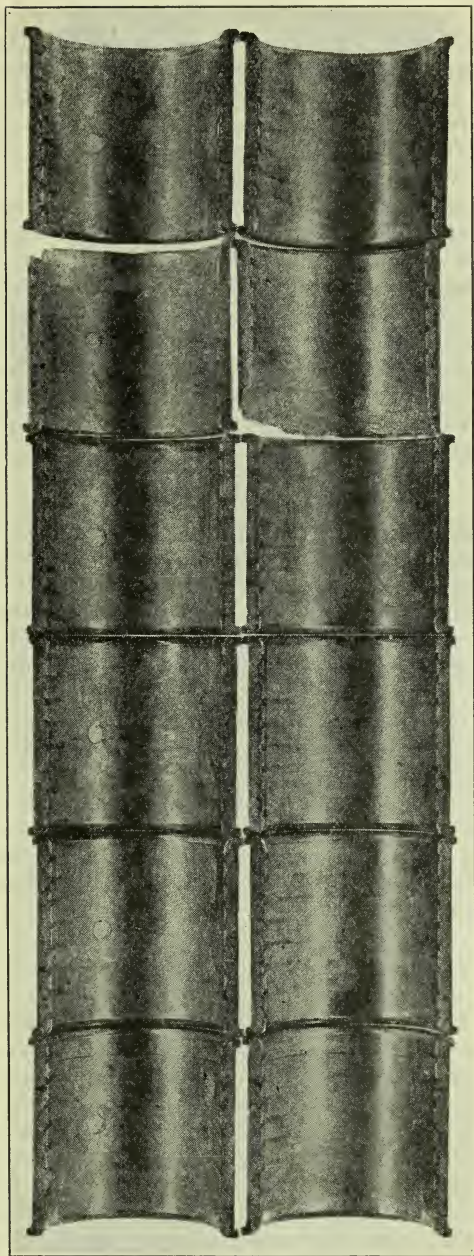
AN IMPROVED FORM OF CONNECTING-ROD BEARING
